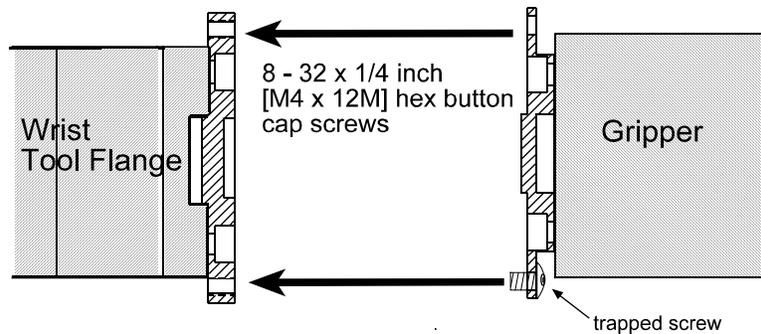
Attaching the wrist tool flange and gripper adapter plates together
